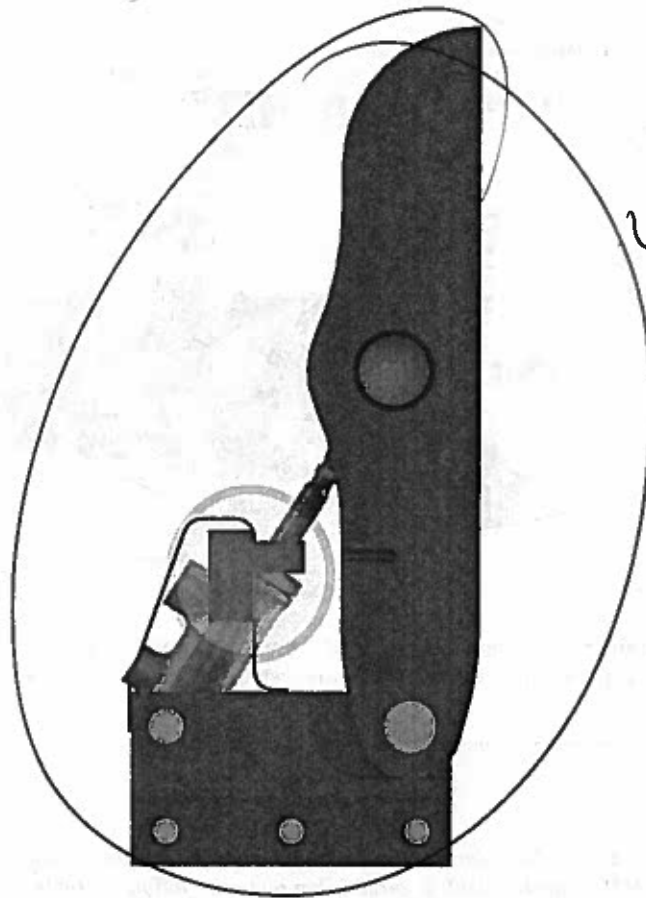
Brake Over-travel Switch: The BOTS is mounted to a sheet metal container which is mounted to the pedal assembly. An aluminum nut threaded over the BOTS acts as the positive stop for the pedal, transmitting the pedal load into the sheet metal rather than the switch itself.
